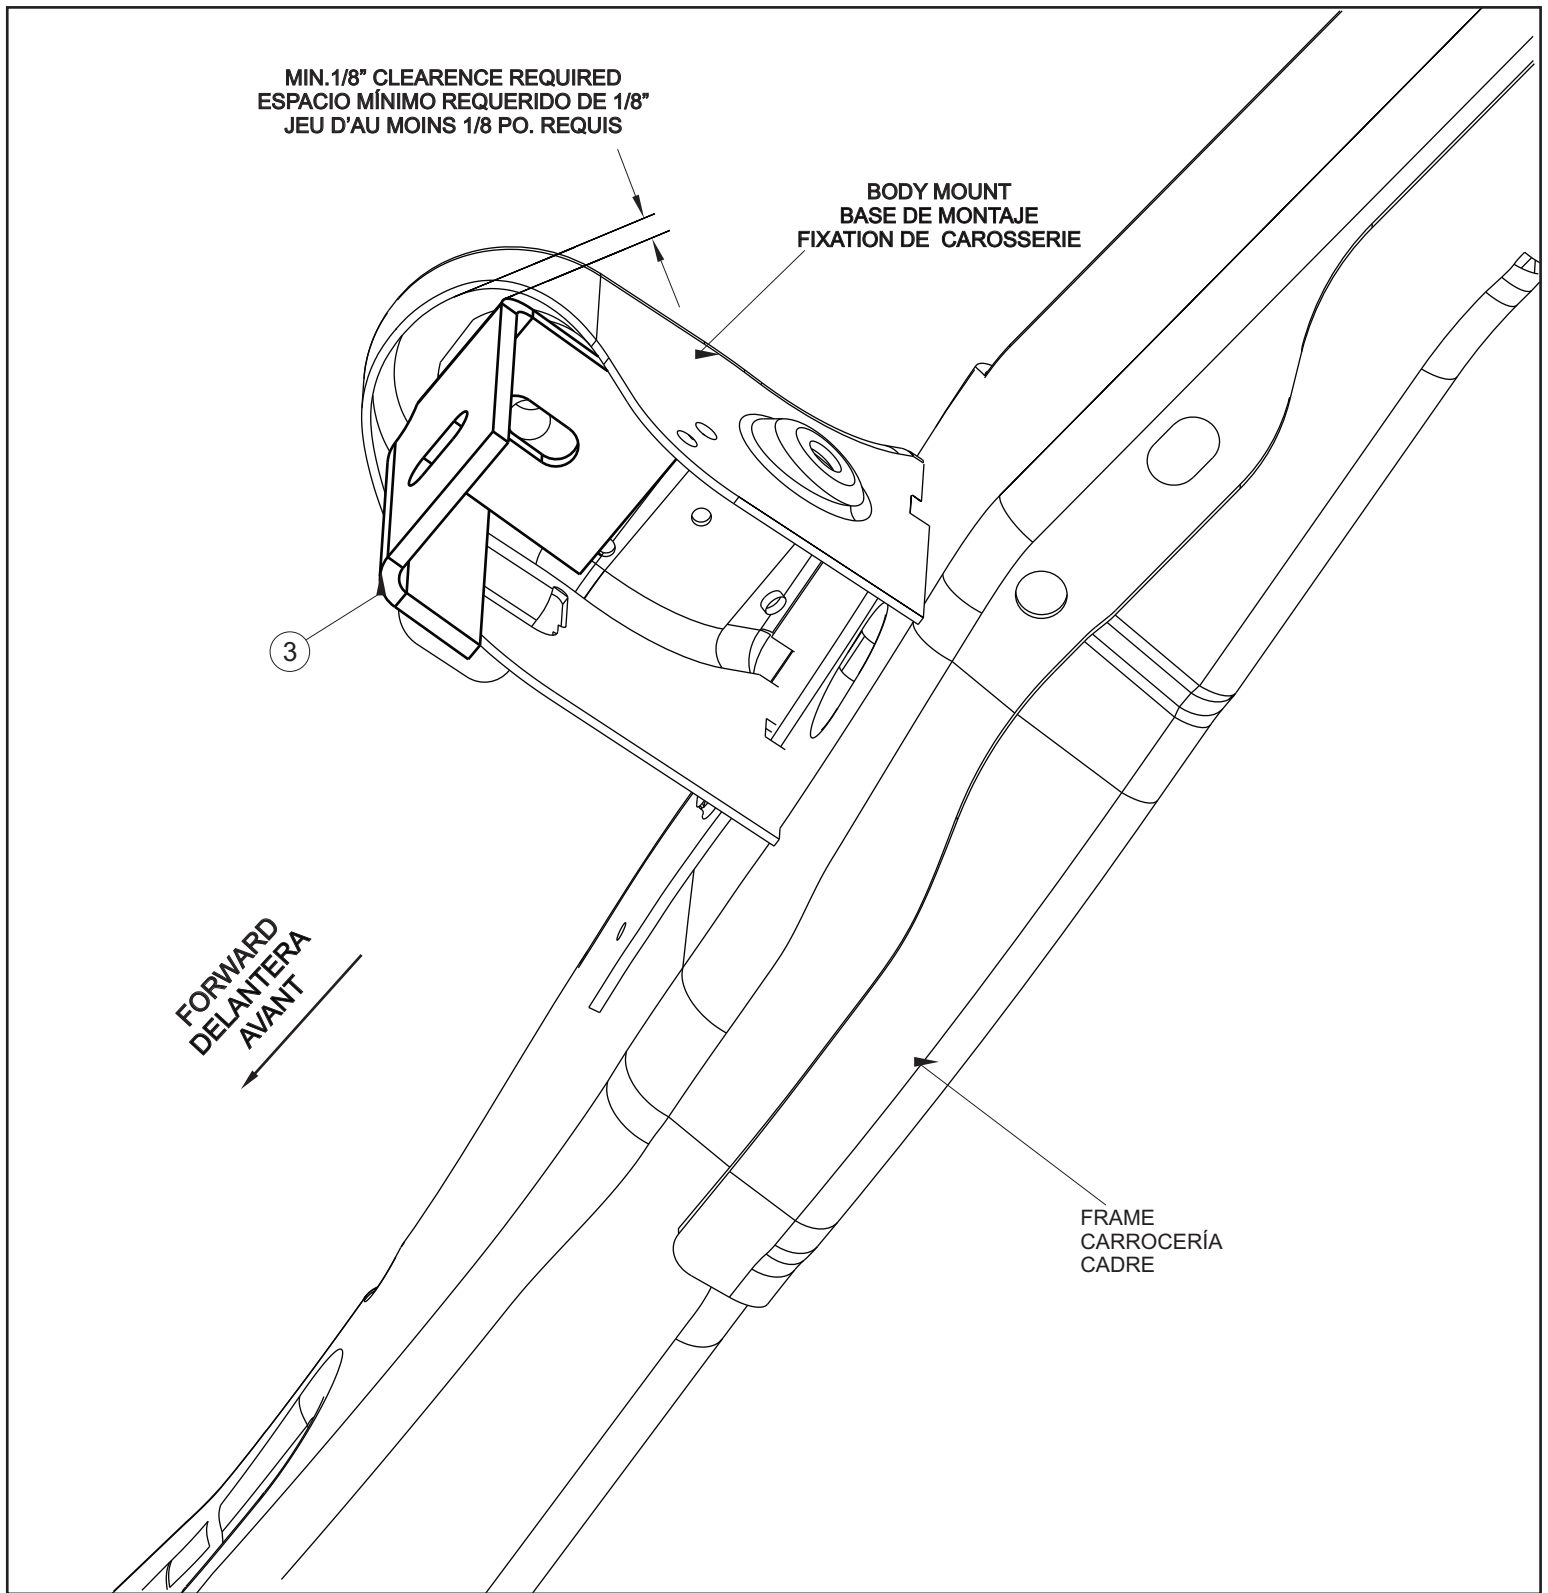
DRIVER SIDE FRONT BODY MOUNT
